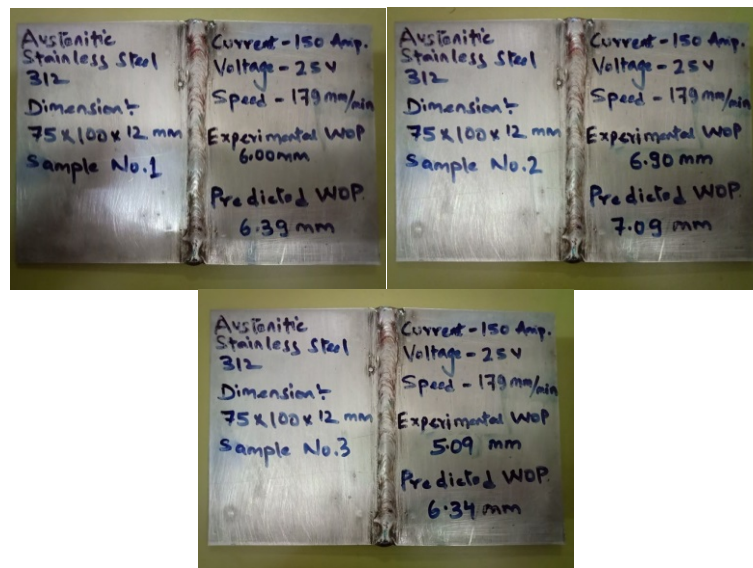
Austenitic stainless steel sample after welding.
